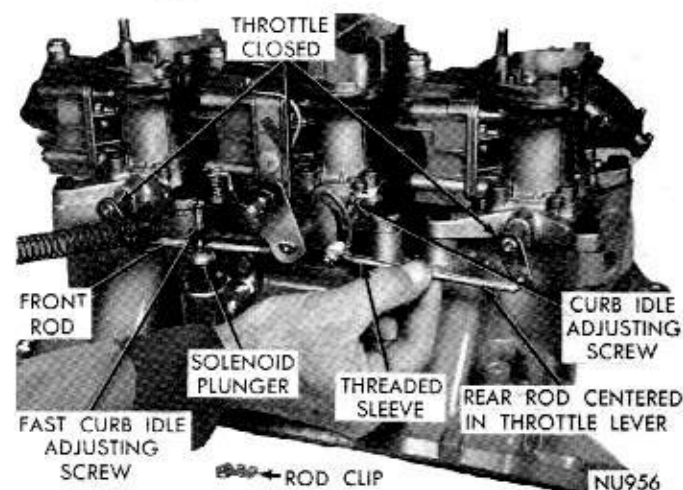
Outboard Carburetor Throttle Rod Adjustment
